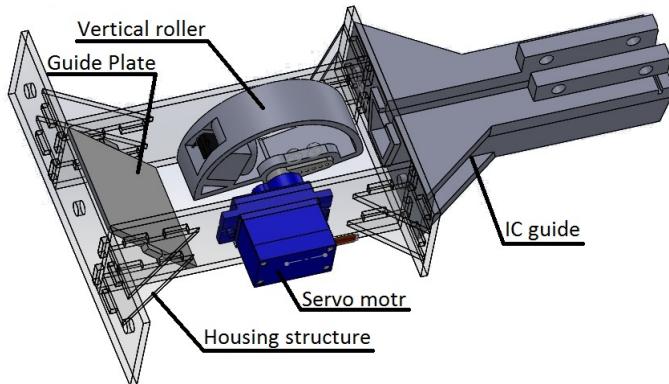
Vertical Roller and Housing Delivery mechanism.
